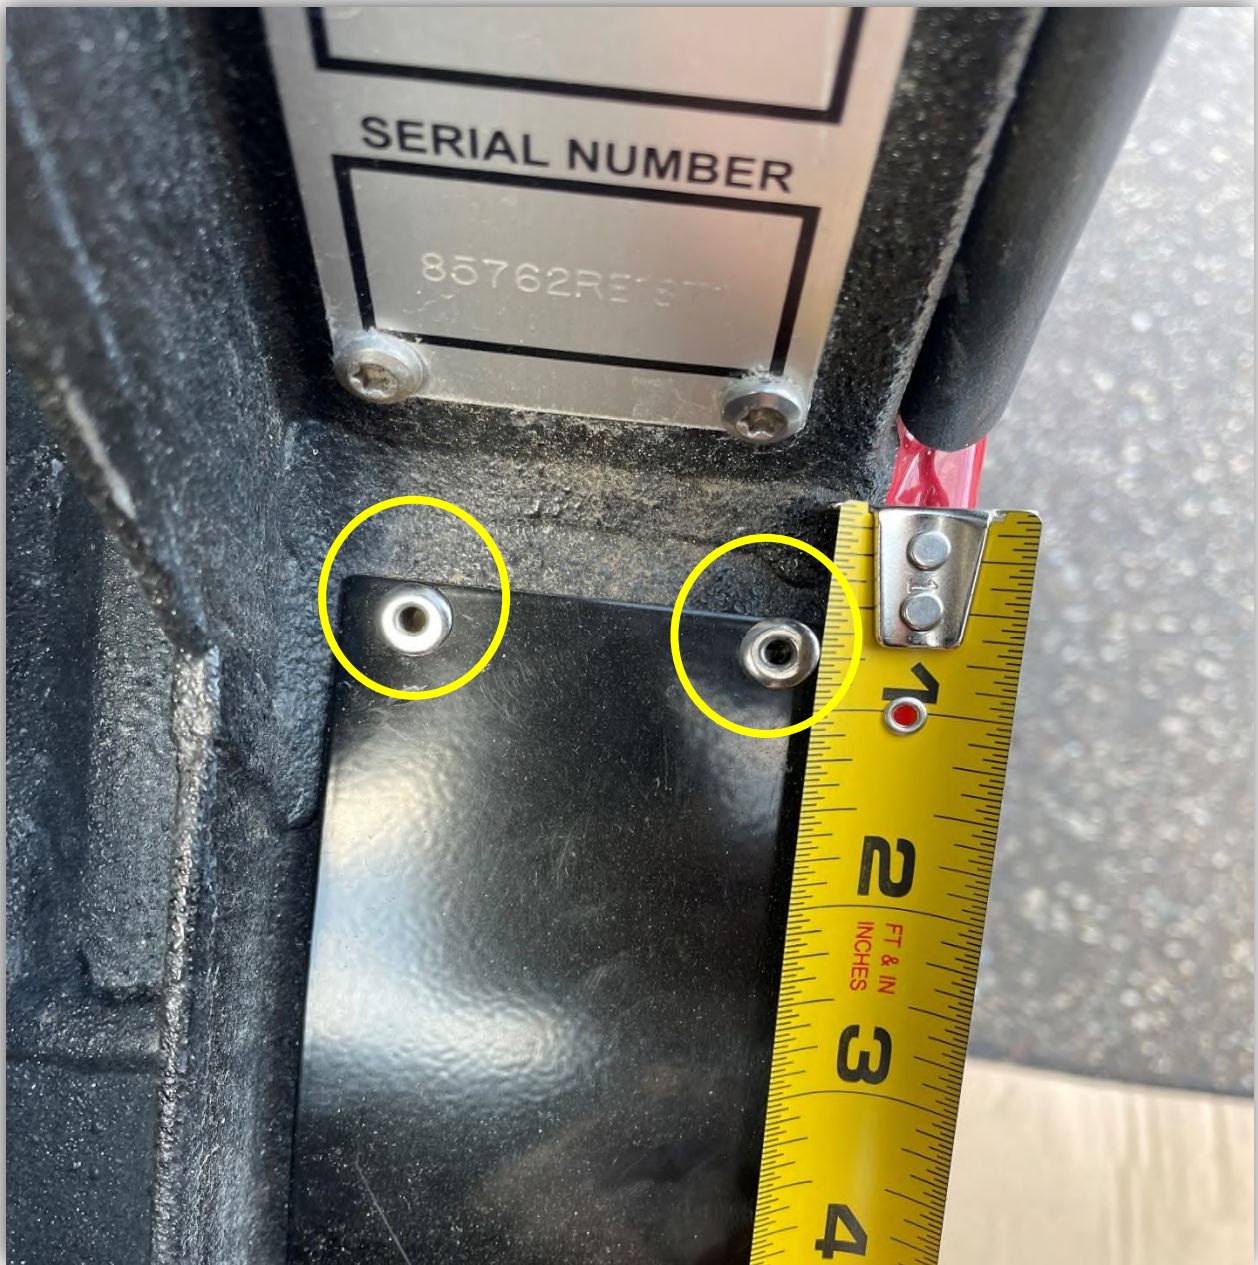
Measurement of distance from seam weld to top VIN Plate holes.
